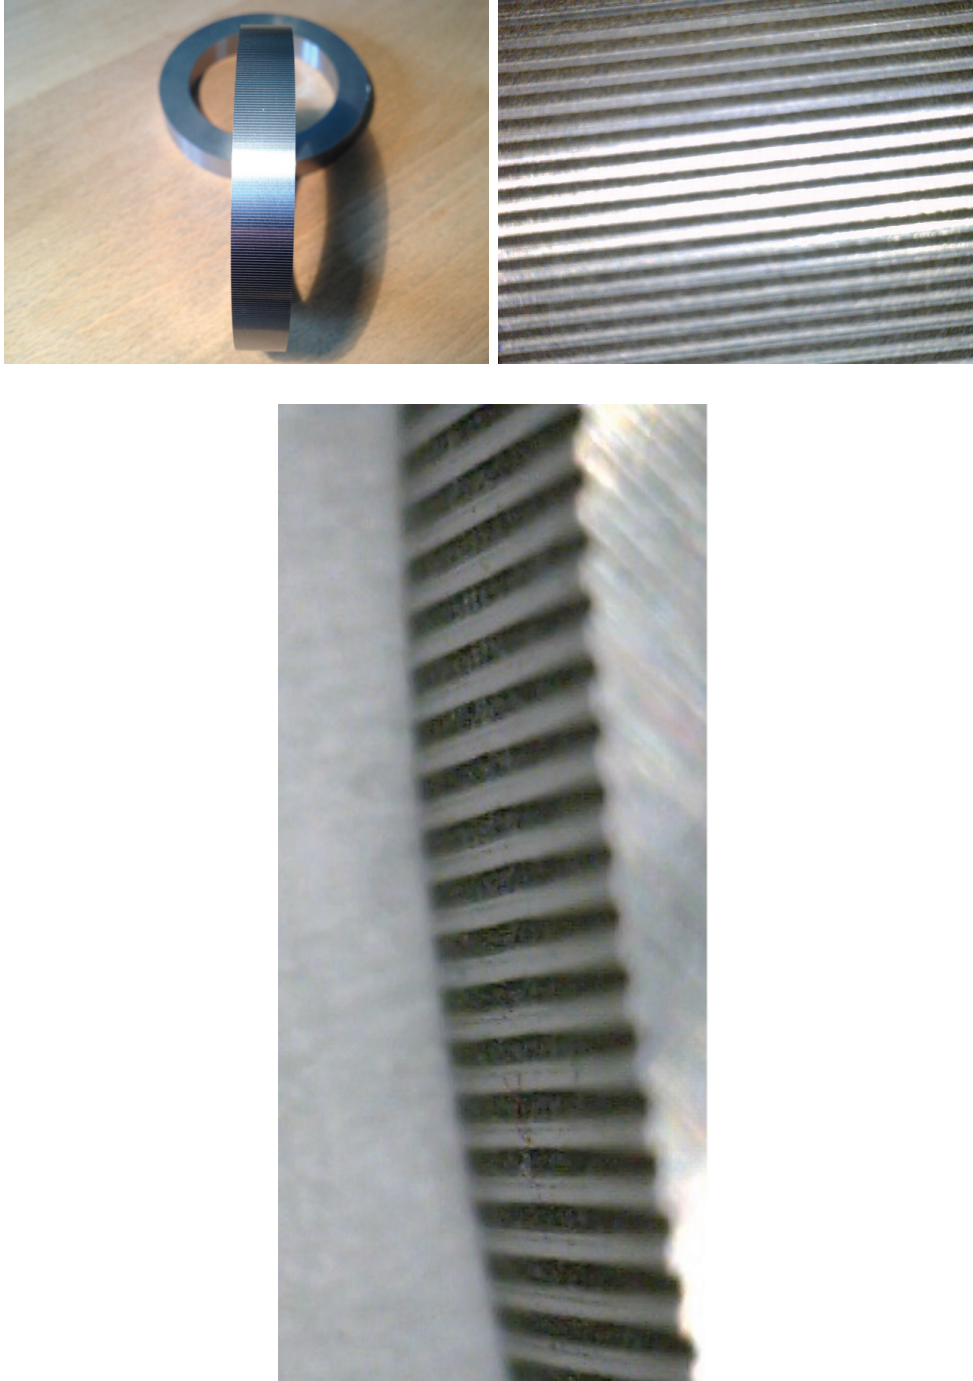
The grooves engraved on the surface on a steel ring using the laser engraving process
